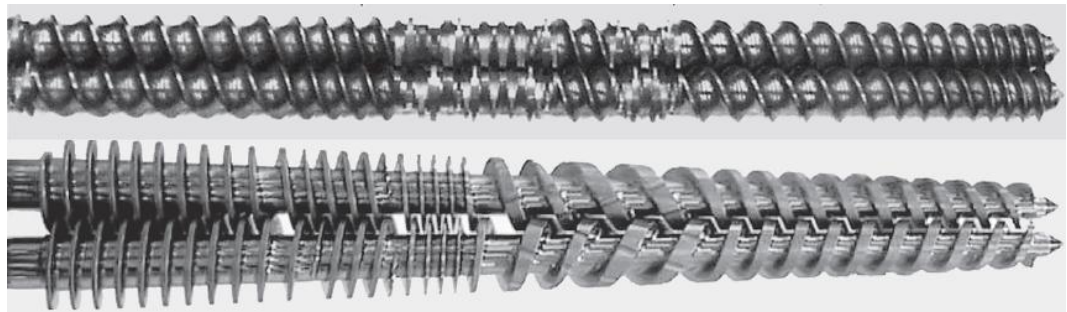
Example of parallel (upper) and conical (lower) twin screw extruder screws (adapted from Giles et. al 2005, 95, 122)
